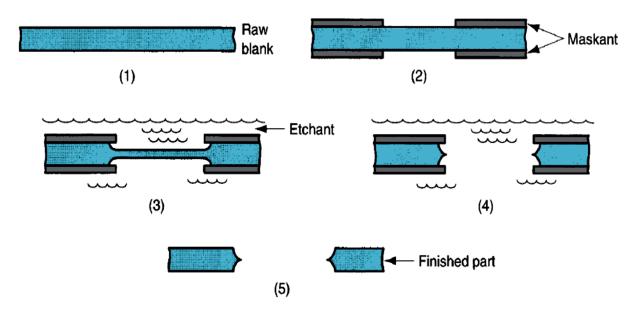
chemical blanking (CB): it uses chemical erosion to cut very thin sheetmetal parts (0.75mm down to 0.025mm) for intricate cutting patterns. Punch
